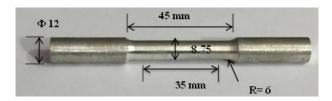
Dimensions of tensile test specimen in (mm) according to ASTM (A370-11).
